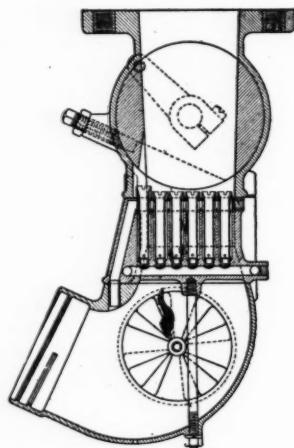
Miller carburetor, showing a sectional view. There are no adjustments
